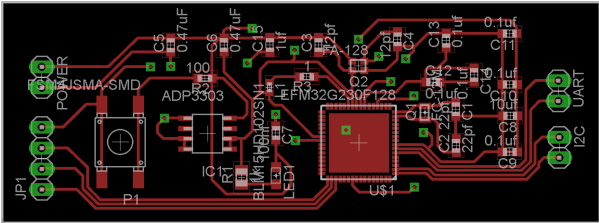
Microcontroller PCB fit for 3D spoon package handle.
